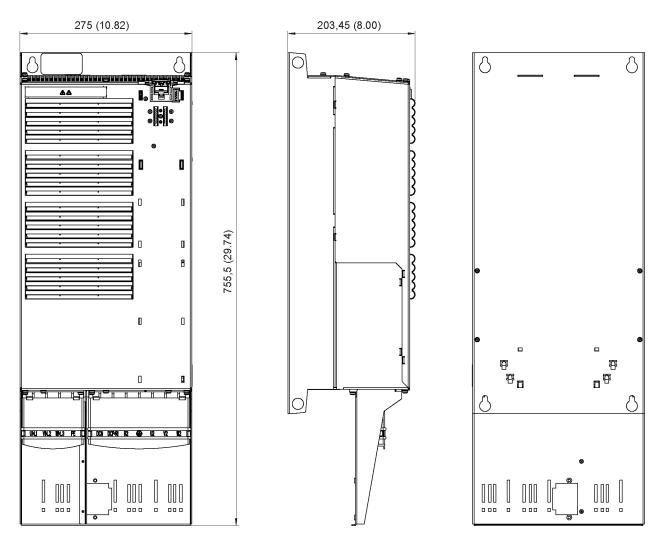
Dimension drawing, PM340 Power Module with screening kit, frame size FSE with integrated line filter, dimensions in mm (inches)
